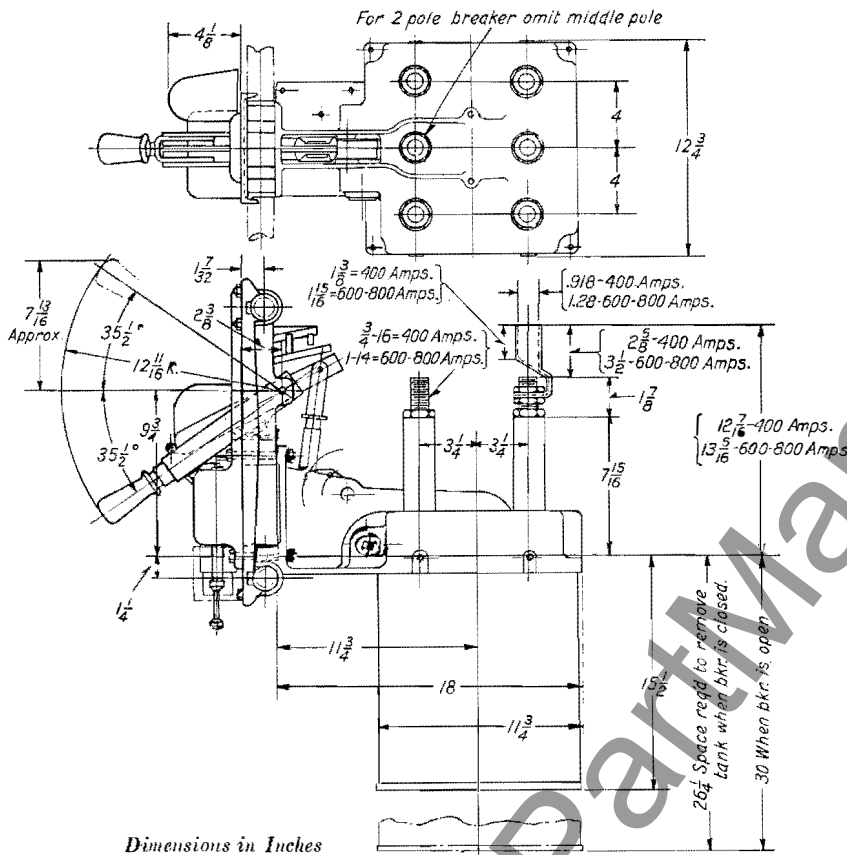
OUTLINE DRAWING FOR TYPE F-122 BREAKER WITH COMMON PIPE MOUNTING FOR UNIT AND COVERPLATE
